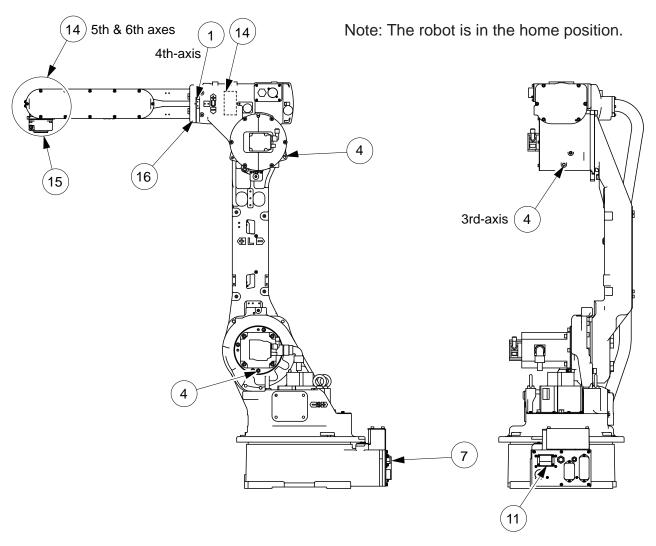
Inspection Parts and Numbers (2 of 2)
